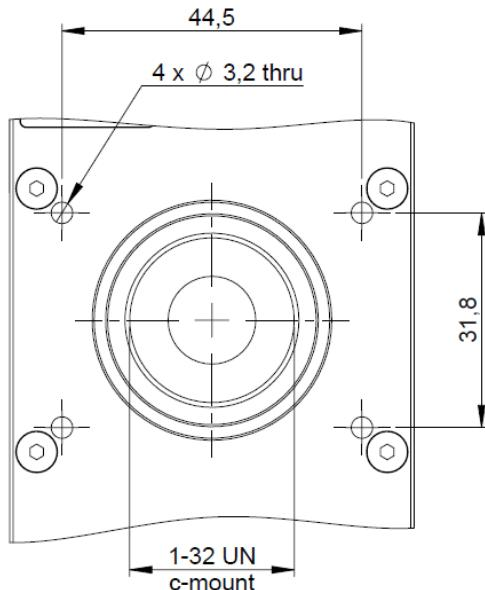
Mounting options on the front side of the PMA Hybrid Unit with pitch and dimensions
